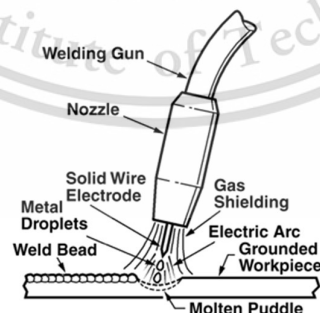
Gas metal arc welding Process (GMAW)
